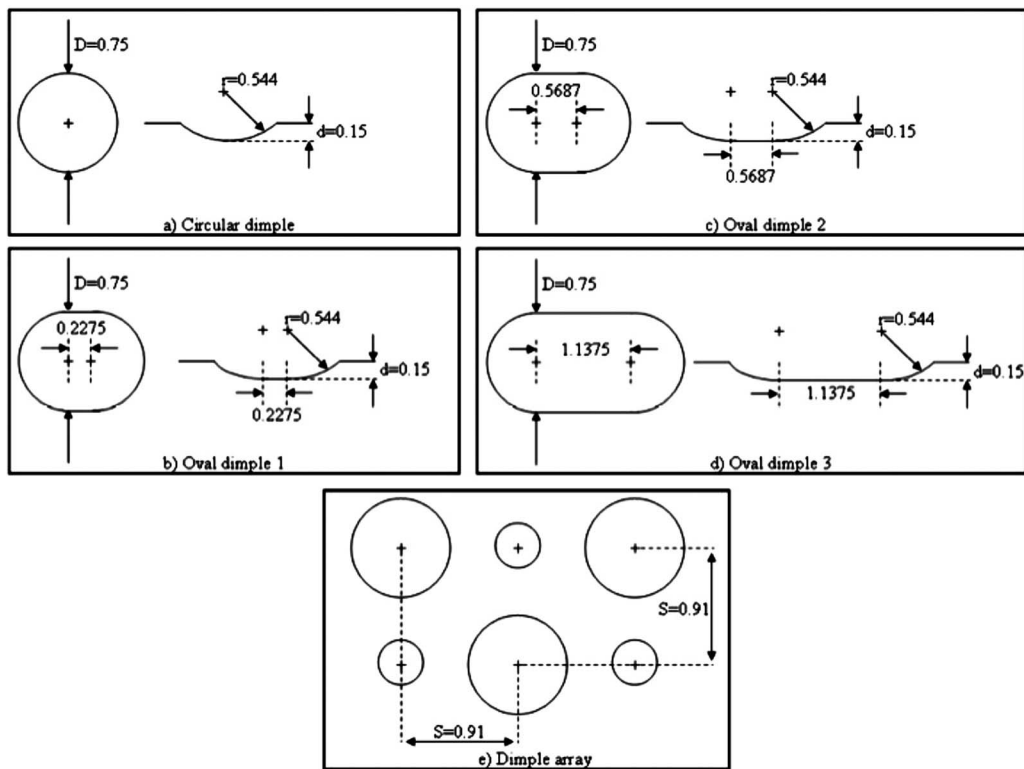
Dimple geometry and array spacing. In (e) the smaller dimple diameter is 0.375. All dimensions are in millimeters.
